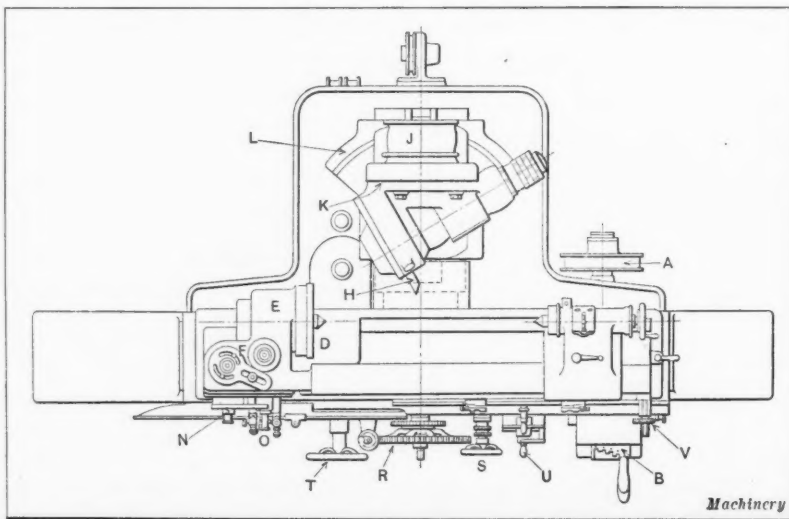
Plan View of Worm Grinding Machine shown in Figs. 1 and 3
